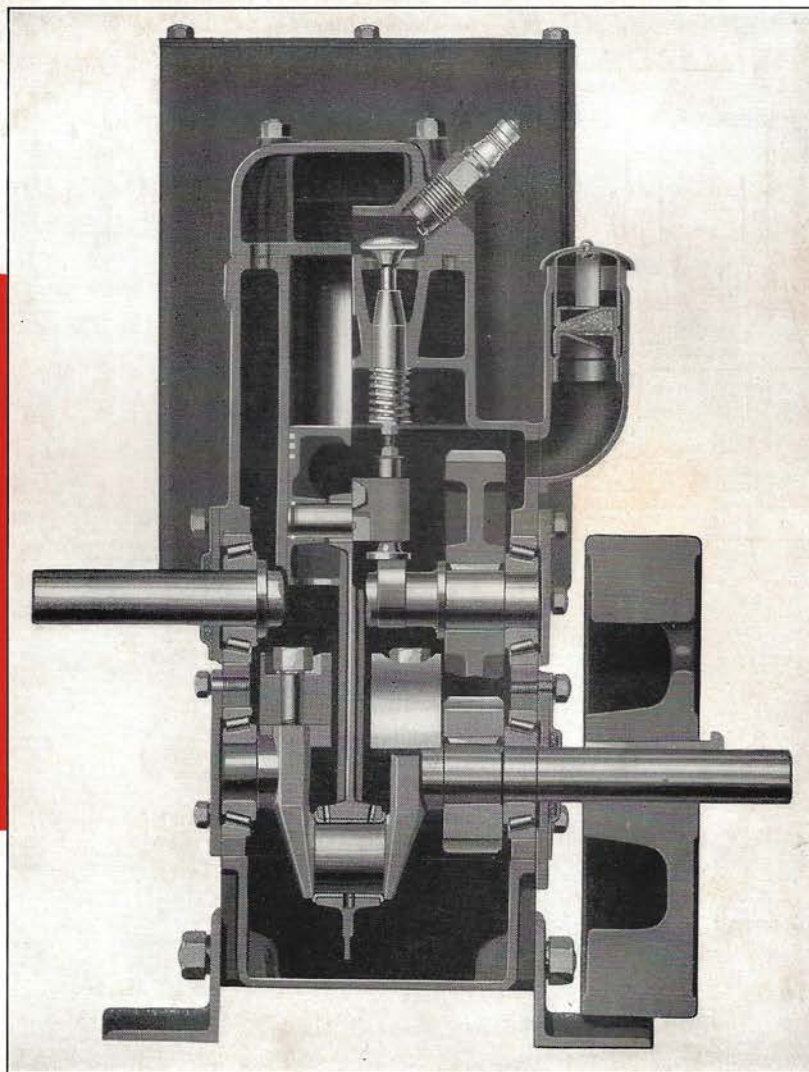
Sectional view of the New Novo AG Rollr Engine showing the simplicity of design. Note the four Timken Roller Bearings on the crank and power shafts, the ample water cooling hopper in the rear, the heavy power gears, the modern combustion chamber design, improved breather, replaceable valve tappet and valve stem guides, the steel base angles and the precisely counterbalanced crankshaft.
